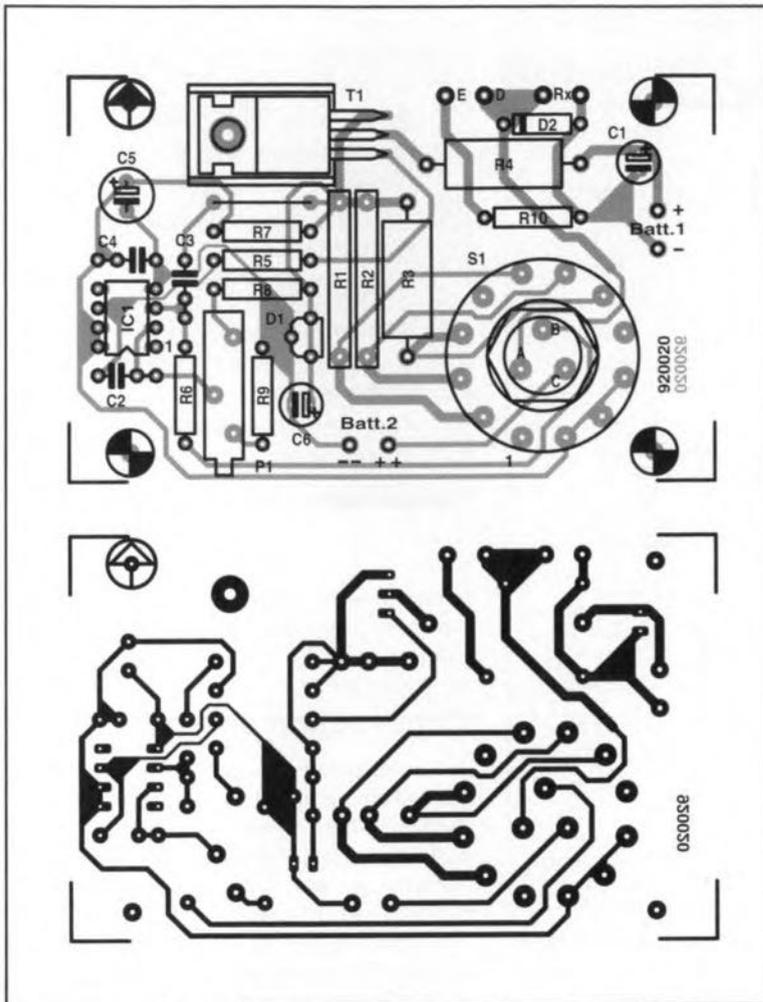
Track layout (mirror image) and component mounting plan of the adaptor PCB.
